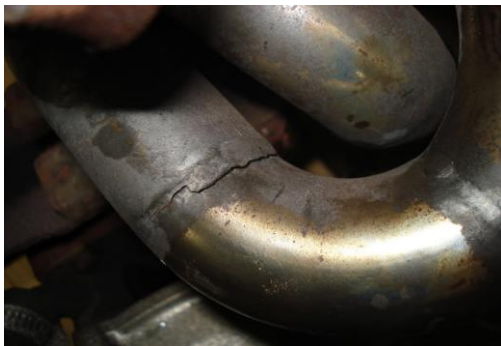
Crack in a pipe weld [courtesy of AMForum].
